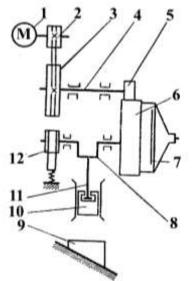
Cinematic scheme of a crank hot-forging press: 1-electric motor; 2 – pulley; 3 – fly-wheel; 4 – shaft; 5, 6 – gears; 7 – friction coupling; 8 – crank; 9 – table; 10 – plunger; 11 – rod; 12 – brake
